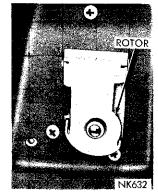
Door Striker Rotor and Striker Plate— Lubrication Points (All Models)
